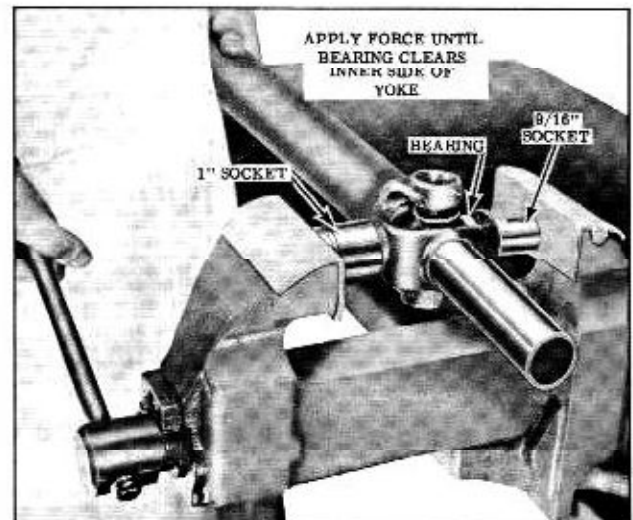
Pressing Bearing From Yoke (Spicer)
